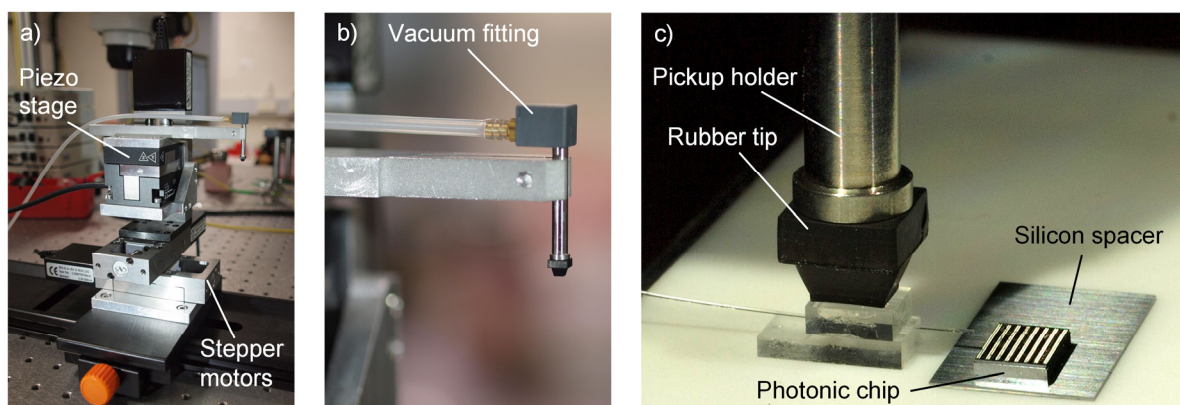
Positioning equipment for the alignment process. a) Positioning stage consisting of stepper motors and piezo-driven handling stages. b) Detail picture of the cantilever tip with a customized vacuum pick-up holder. c) Close-up photograph of the pick-up holder that is equipped with an appropriate rubber tip.
